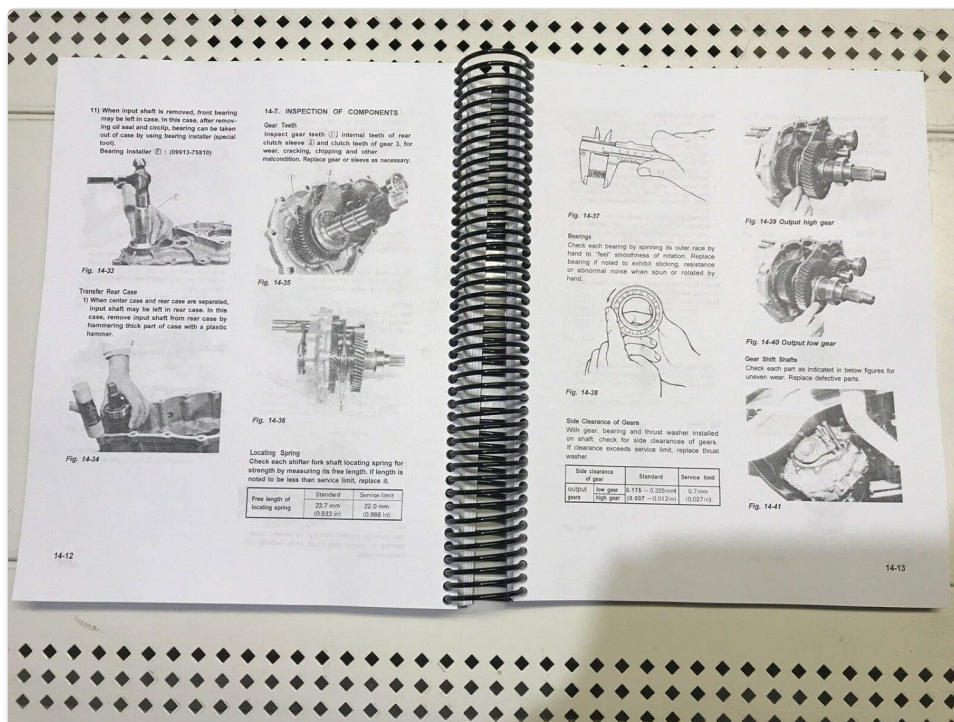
An internal page from the manual illustrating the inspection of transmission components such as gear teeth (Fig. 14-27), gear shift seals (Fig. 14-28), and the transfer rear case assembly (Fig. 14-32, 14-35).
